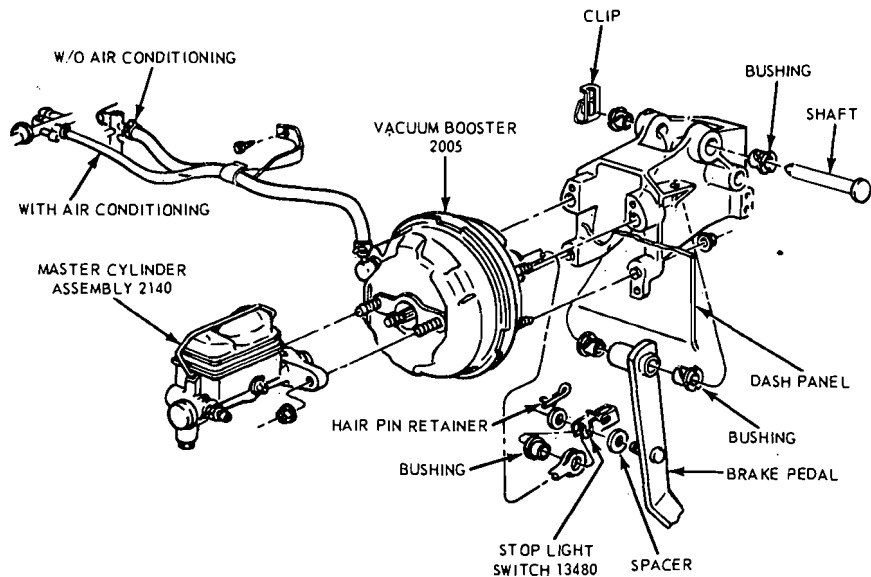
Master Cylinder Installation—Power Brake—Ford, Mercury and Meteor
